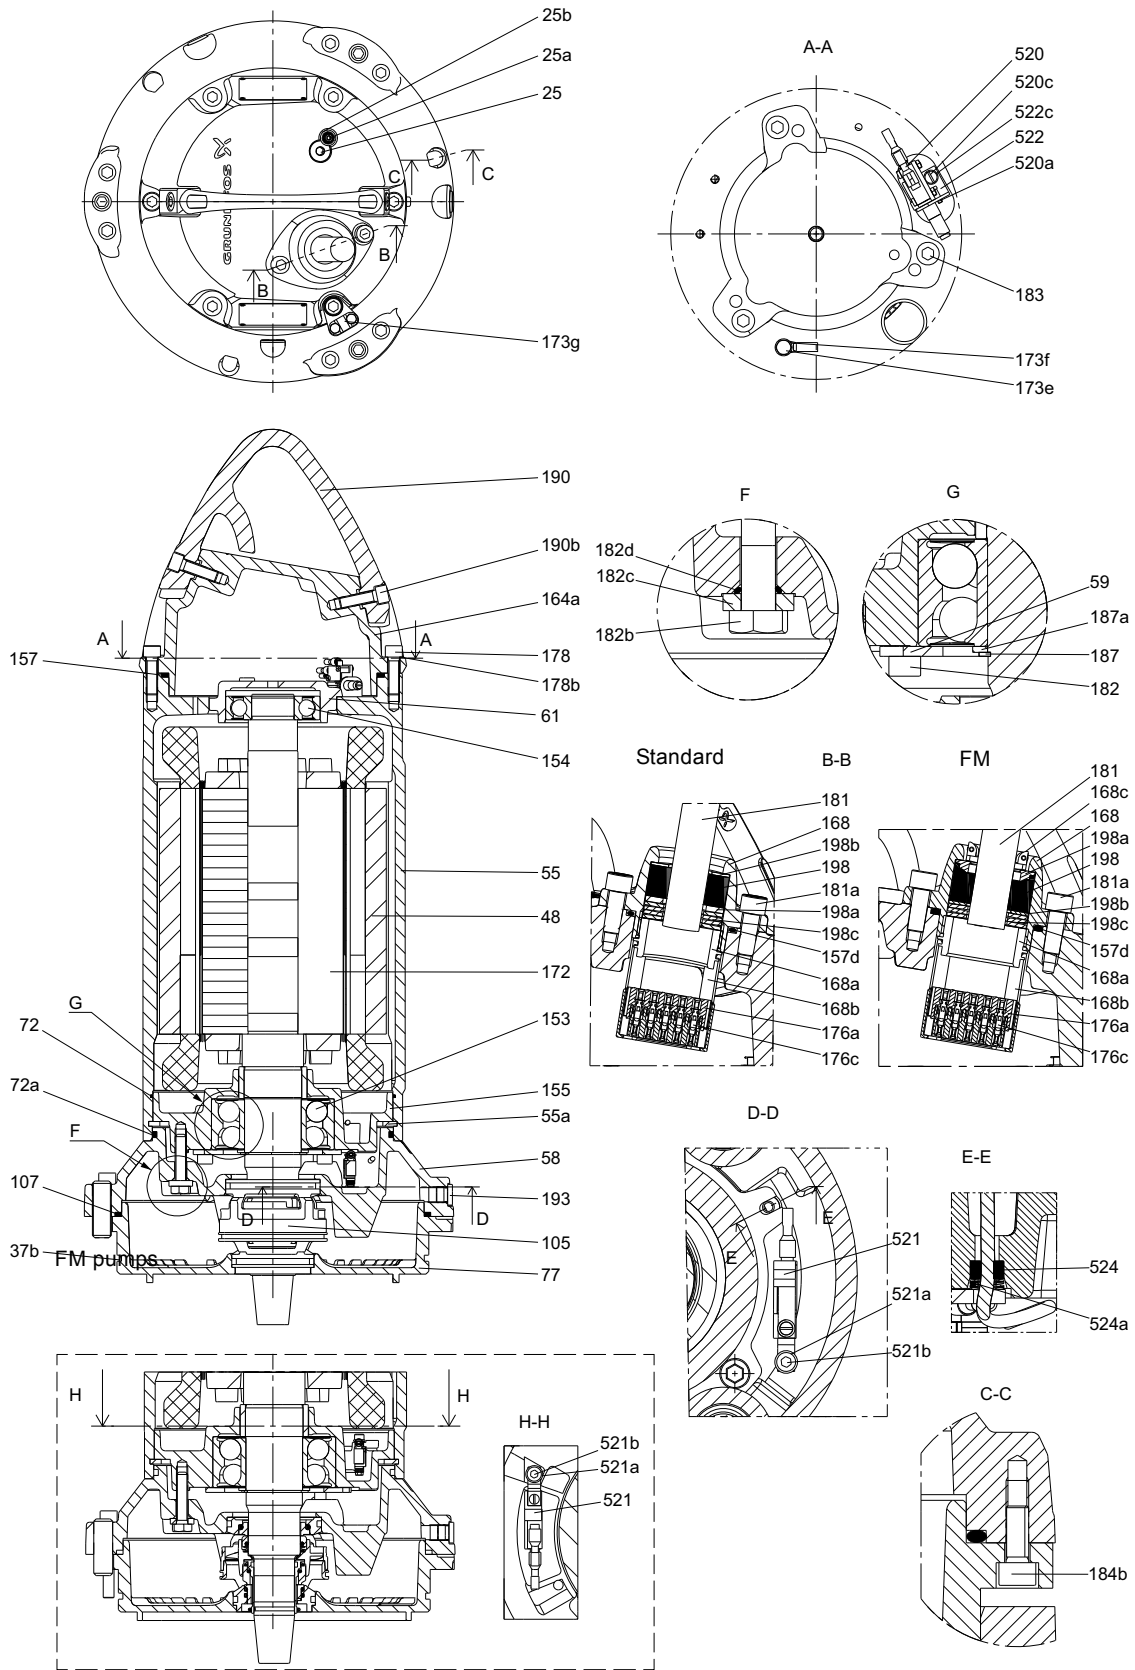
Sectional drawing, SE pump without cooling jacket, 2-4 poles
